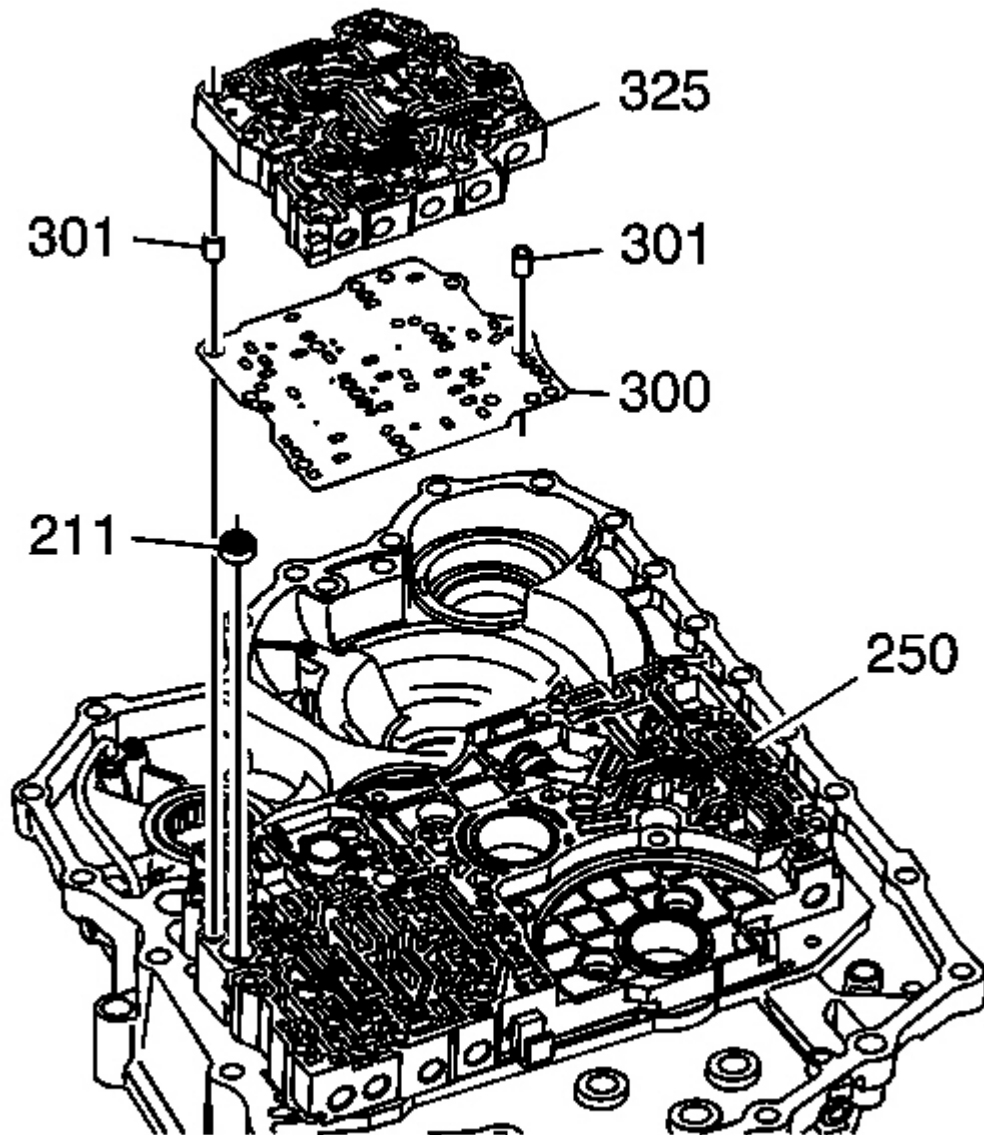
Servo Valve Body Spacer Plate, Locating Pins & Transmission Fluid Filter
